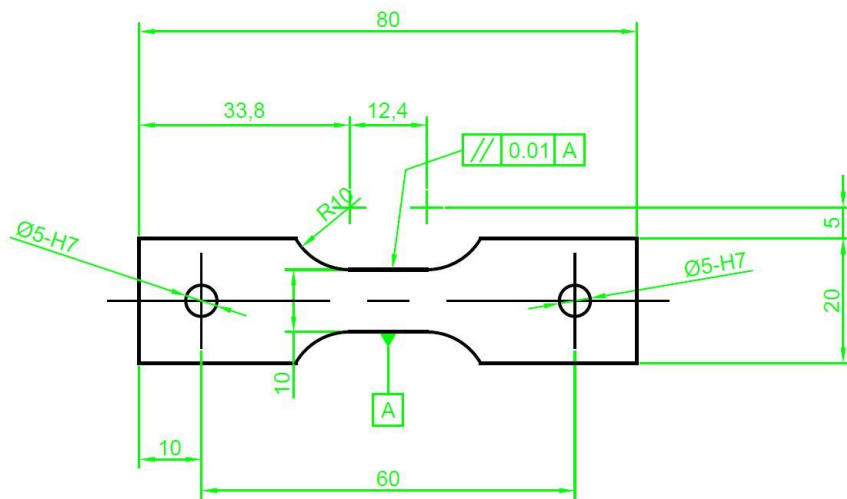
Dimensions of the dogbone specimens. Specimens were 3 mm thick.
